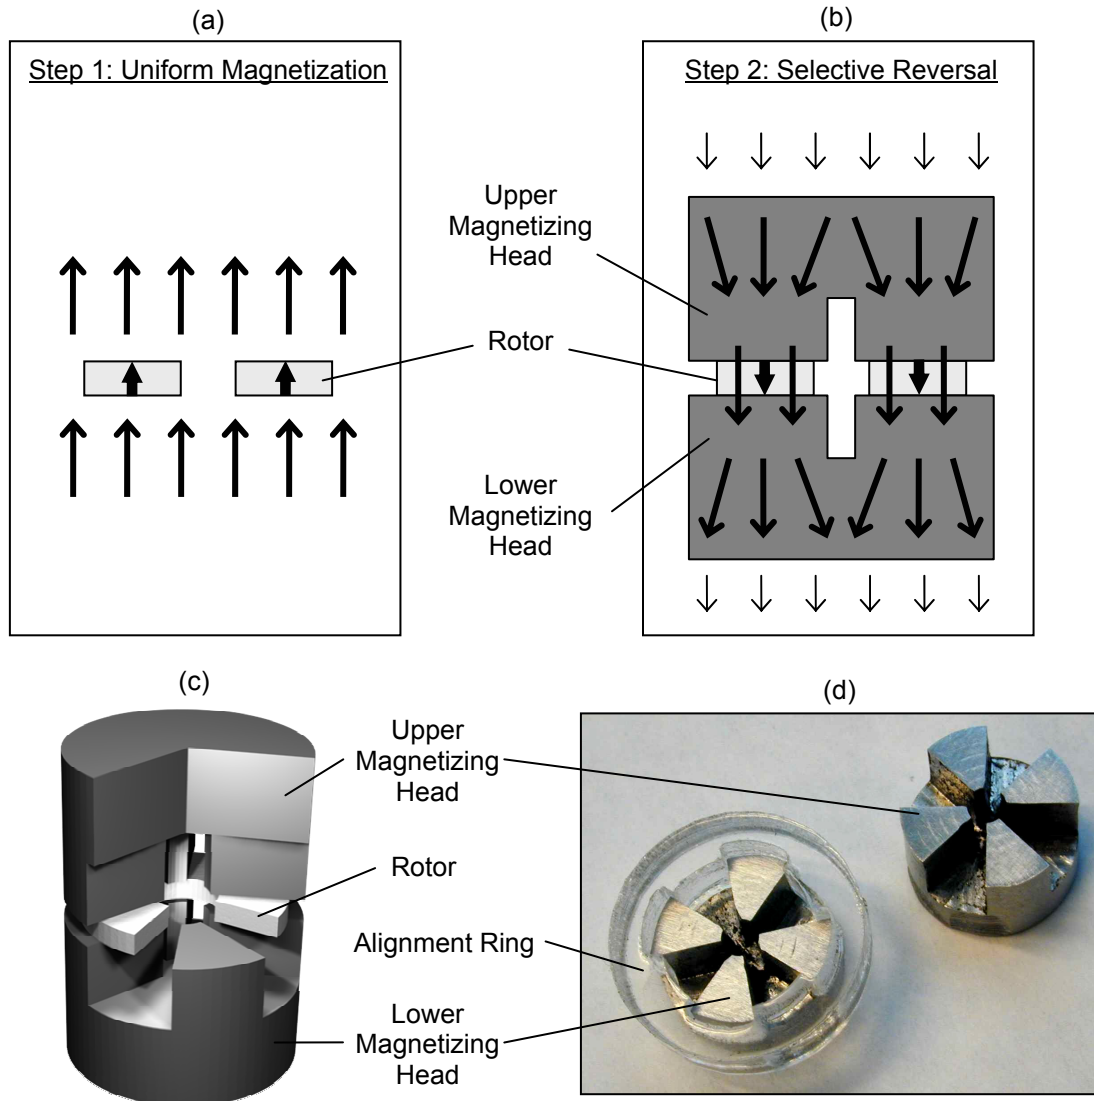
Method for magnetic patterning of multi-pole PM rotor: (a) initial uniform magnetization; (b) selective pole reversal using magnetizing head; (c) cutaway view of magnetizing head; (d) photograph of magnetizing heads.
